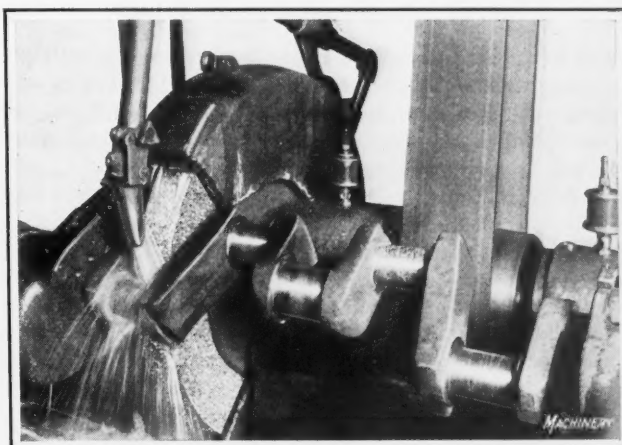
Grinding Crankpins on a Double-head Type of Machine
